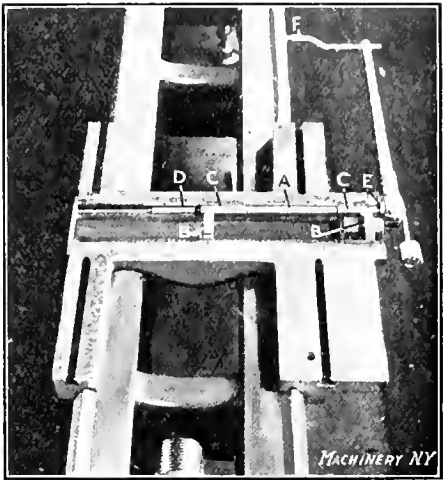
Top View of Carriage, showing Method of Squaring the Carriage with the Bed. Springs B and D hold the Sweep in Position, enabling One Man to make the Test
